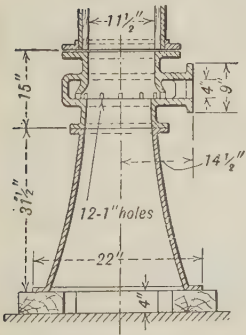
Foot-pieces for air-lifts (Sullivan Machinery Co.).
